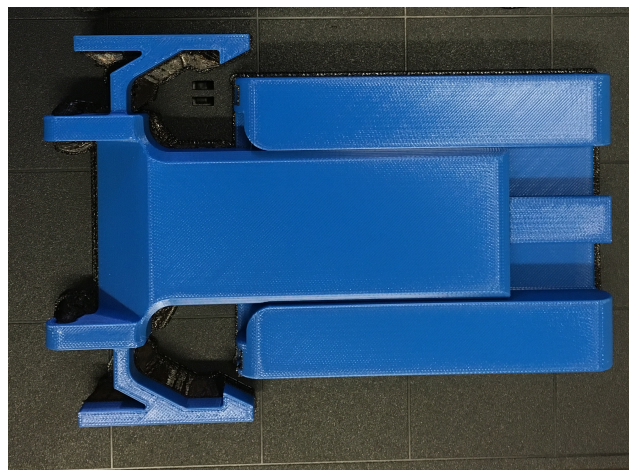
Some of the 3D printed joint and connector pieces using FullCure720 material
